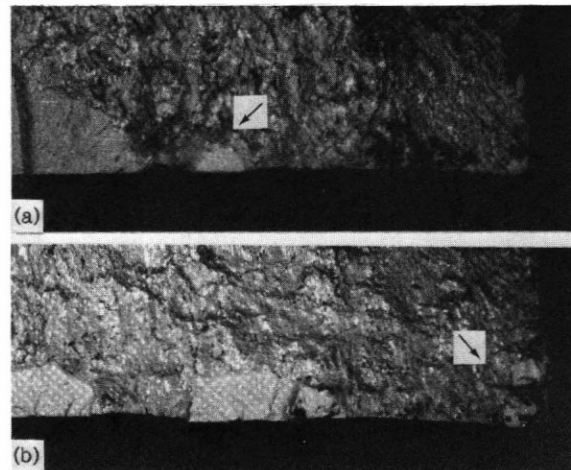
Fatigue crack initiation at (a) near inlet end of hole and (b) outlet end of hole in 15 mm thick specimen. Magnification x45
